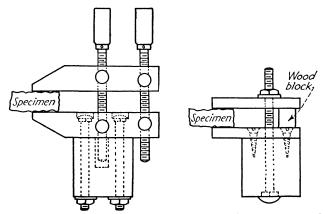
Two methods of holding a specimen while it is being sawed.
